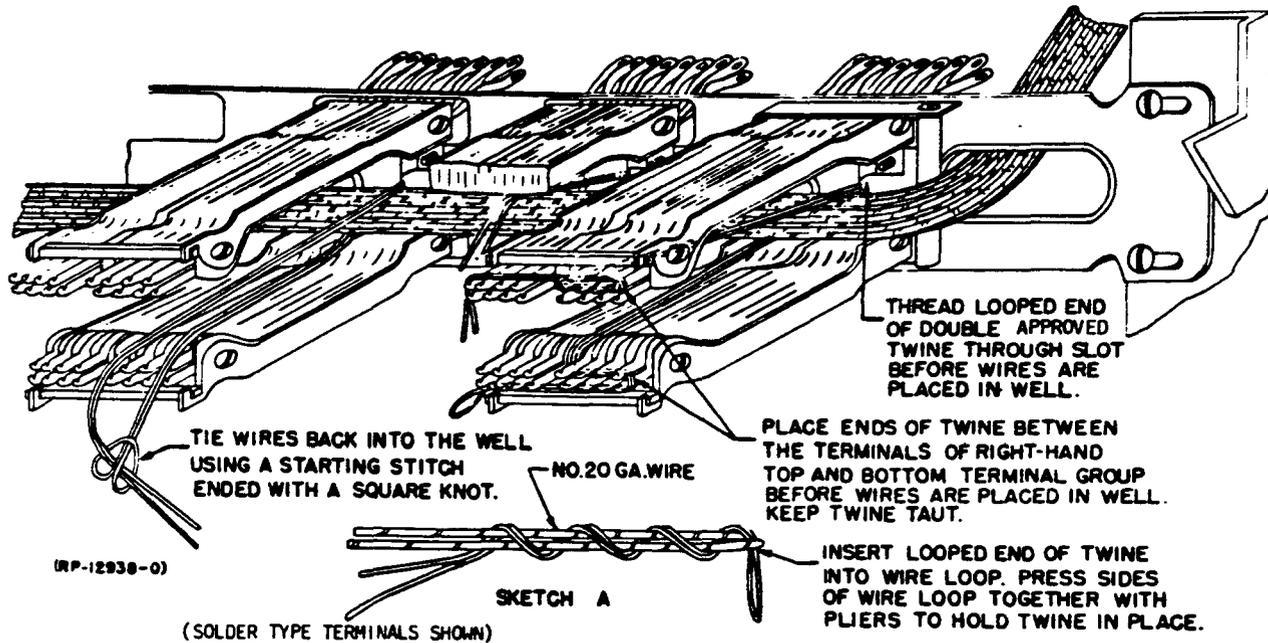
STRIPS, TERMINAL - 227 AND SIMILAR TYPES - SWITCHBOARD CABLE, FRAME LOCAL CABLE AND SURFACE WIRING - WITHOUT RETAINING CLIP (PAR. 2.33)
